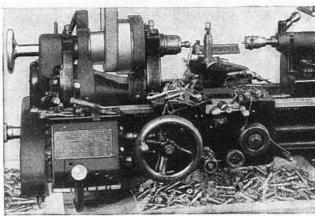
Manufacturing Small Screws on the 9-inch Lathe Equipped with Draw-in Chuck
